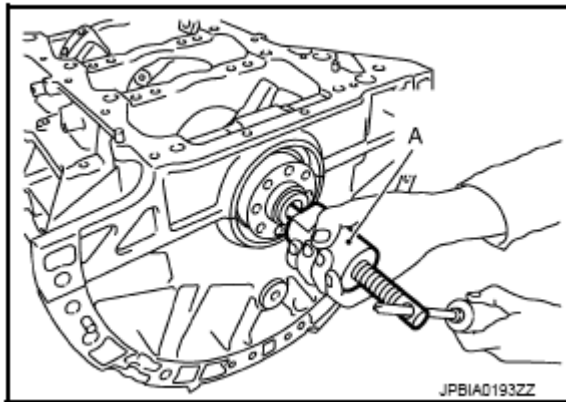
Removing Pilot Converter Using Pilot Bushing Puller
